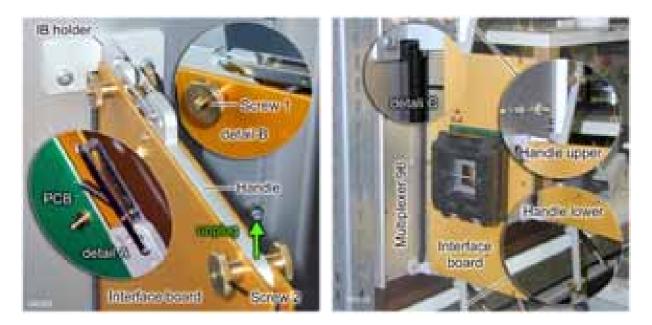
Handling system of the interface board with detailed views (left), unplugged interface board with detailed view of positions of both handles (right)
